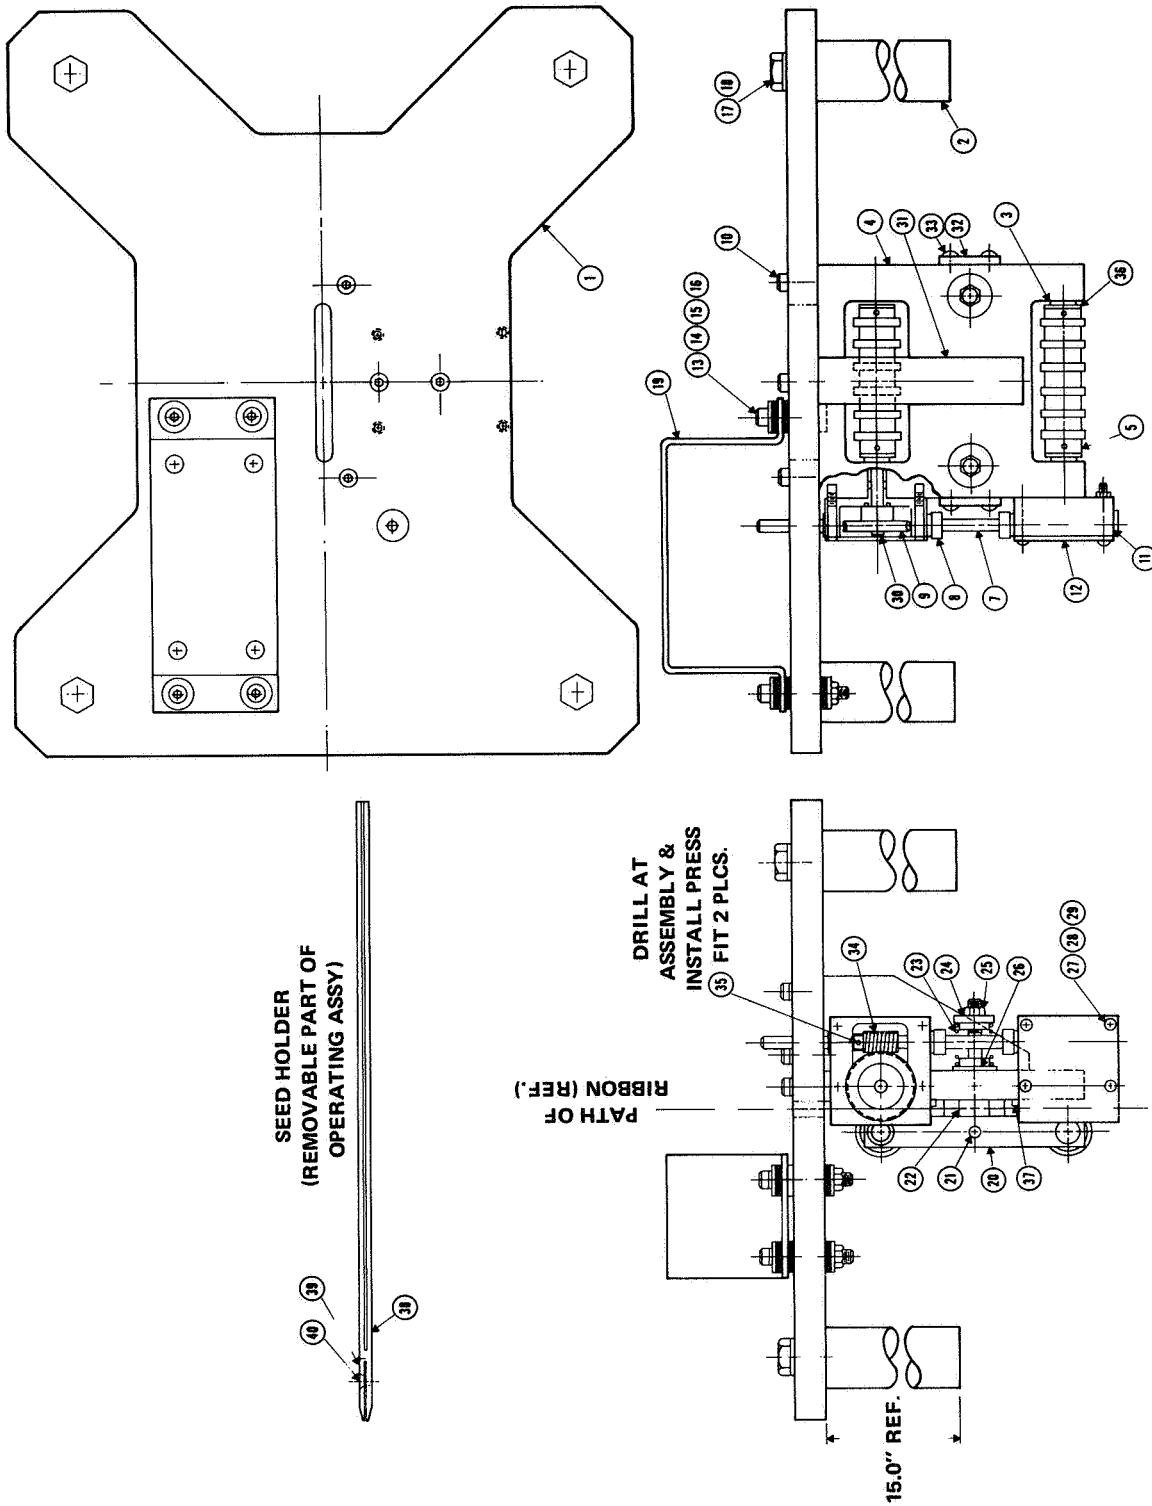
Pull Mechanism – Ribbon Puller (Sheet 1 of 2)
